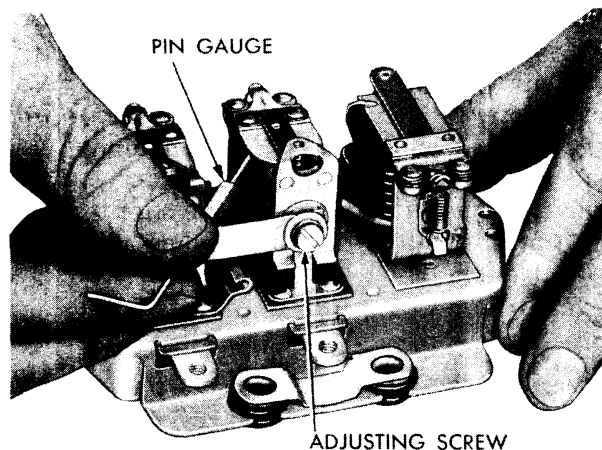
Checking Air Gaps (With Wire Gauge from Tool Kit C-828)
